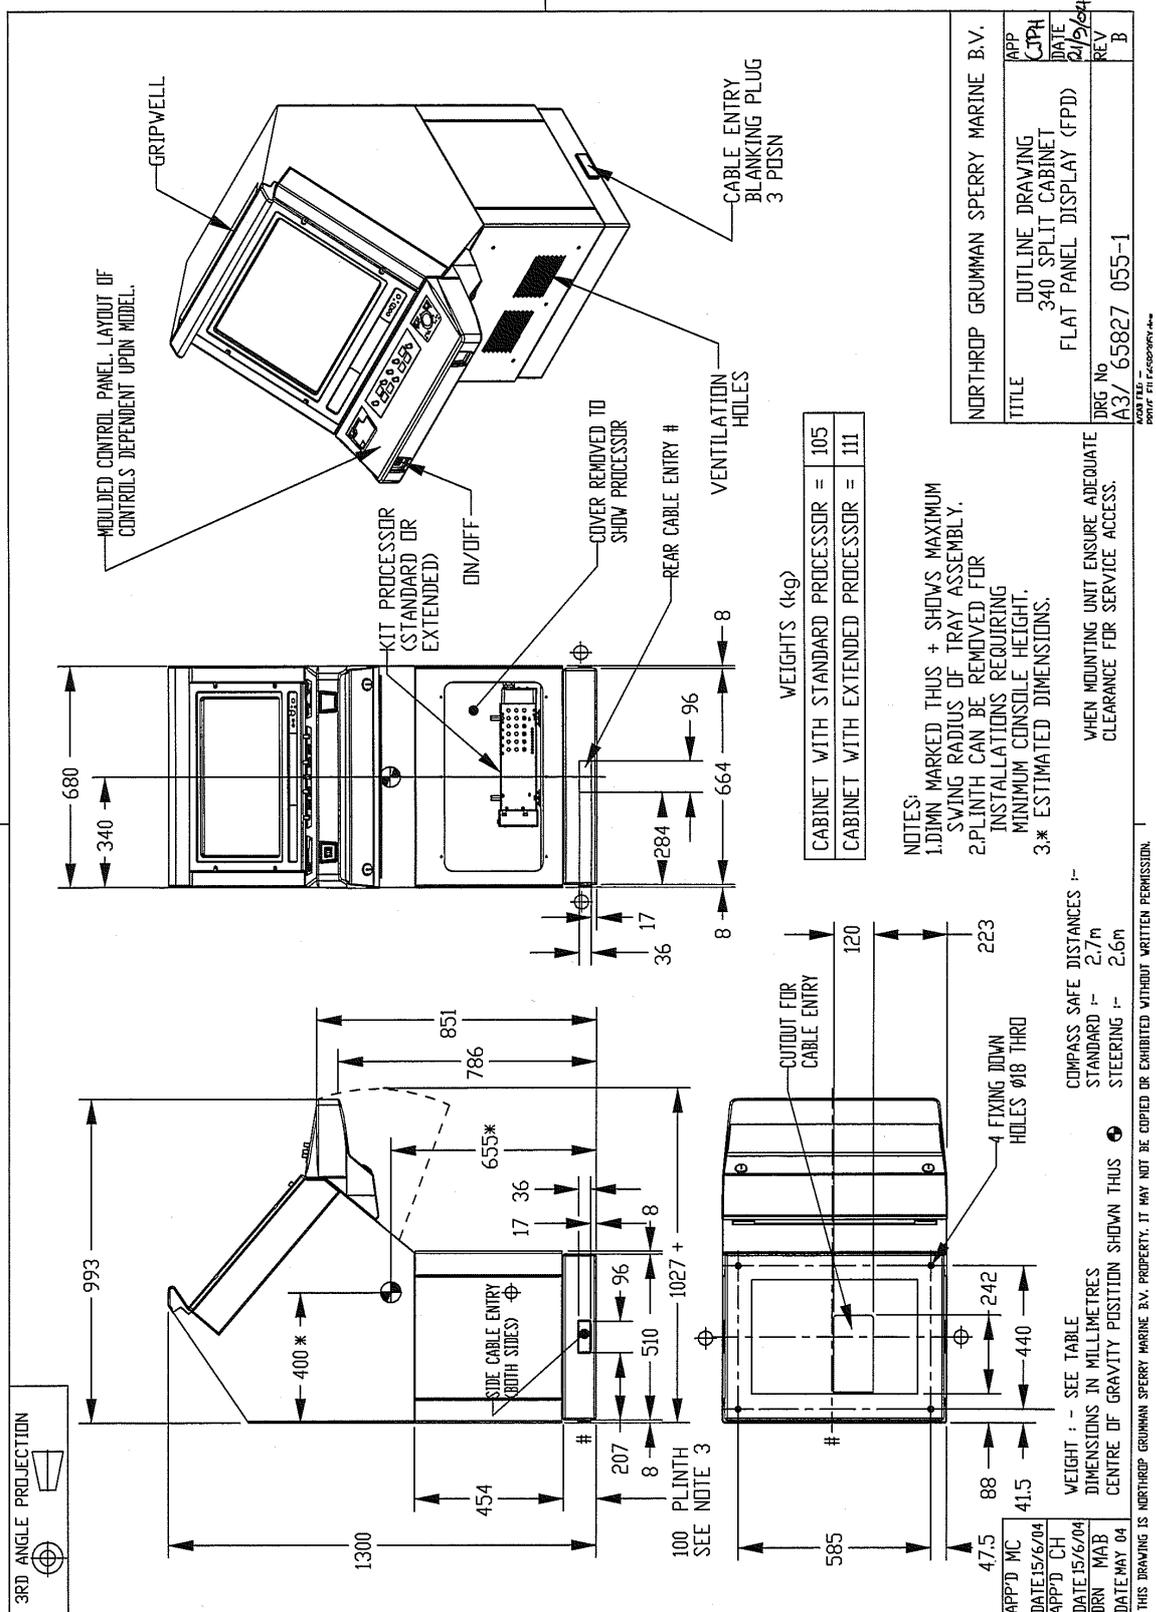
340 Deck Mounted Display Unit (FPD with moulded tray) Outline Drawing
